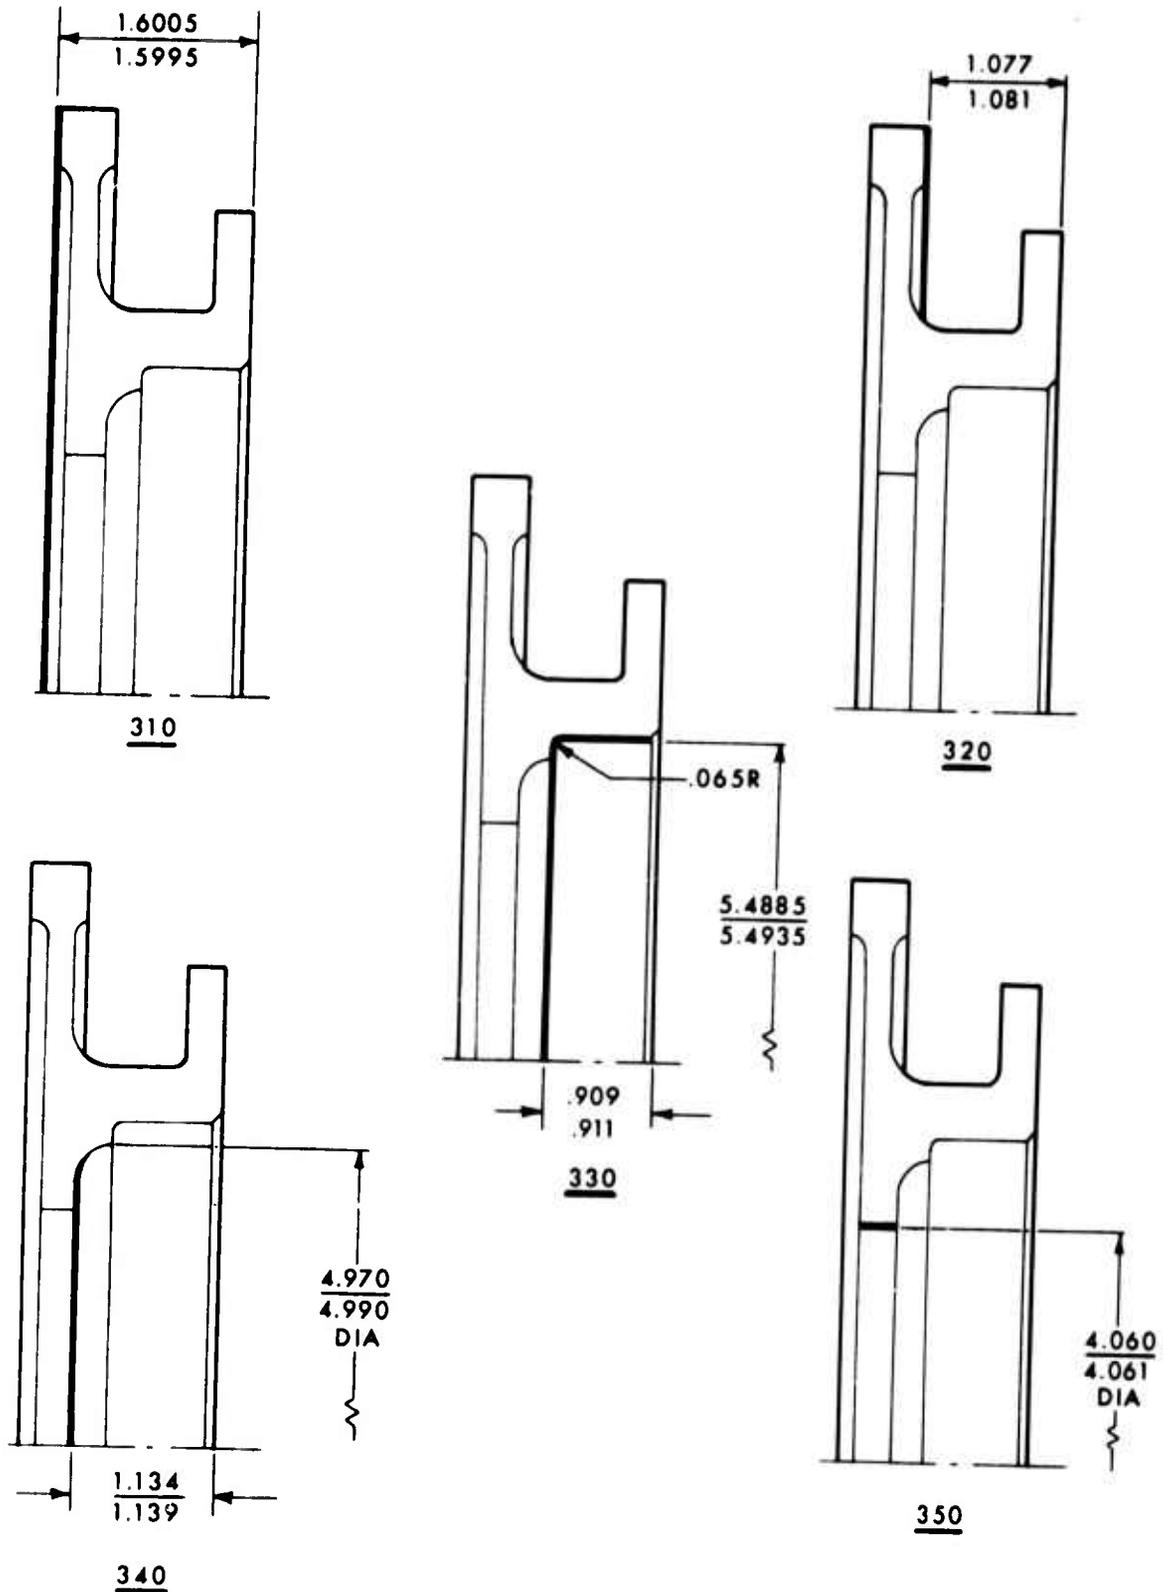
RG351-11278-102: Machine Operation Drawing (Sheet 3 of 3).
